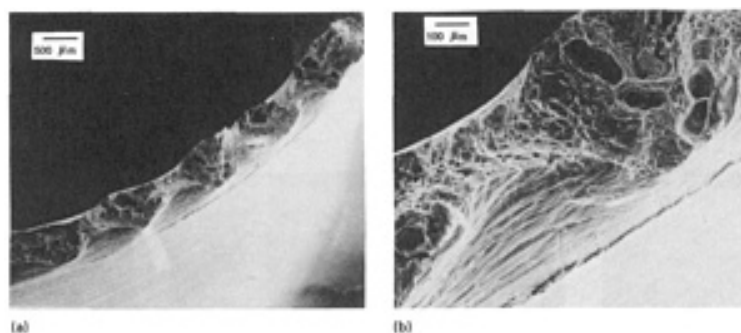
SCANNING ELECTRON FRACTOGRAPHS OF FRACTURE SPECIMEN FROM CLAD TRILAYER OF 5083 AL-5052 AL-TYPE 304L STAINLESS STEEL. (A) FRACTURE OF 5083 AL-5052 AL BOND INTERFACE, SHOWING DUCTILE TENSILE OVERLOAD CHARACTERISTICS AND INCIPIENT FRACTURE IN THE 5052 AL-TYPE 304L STAINLESS STEEL BOND. 65 \times . (B) LOW-MAGNIFICATION VIEW OF INTERFACE SHOWING THAT FRACTURE PATH FOLLOWS WAVE MORPHOLOGY. 16 \times
